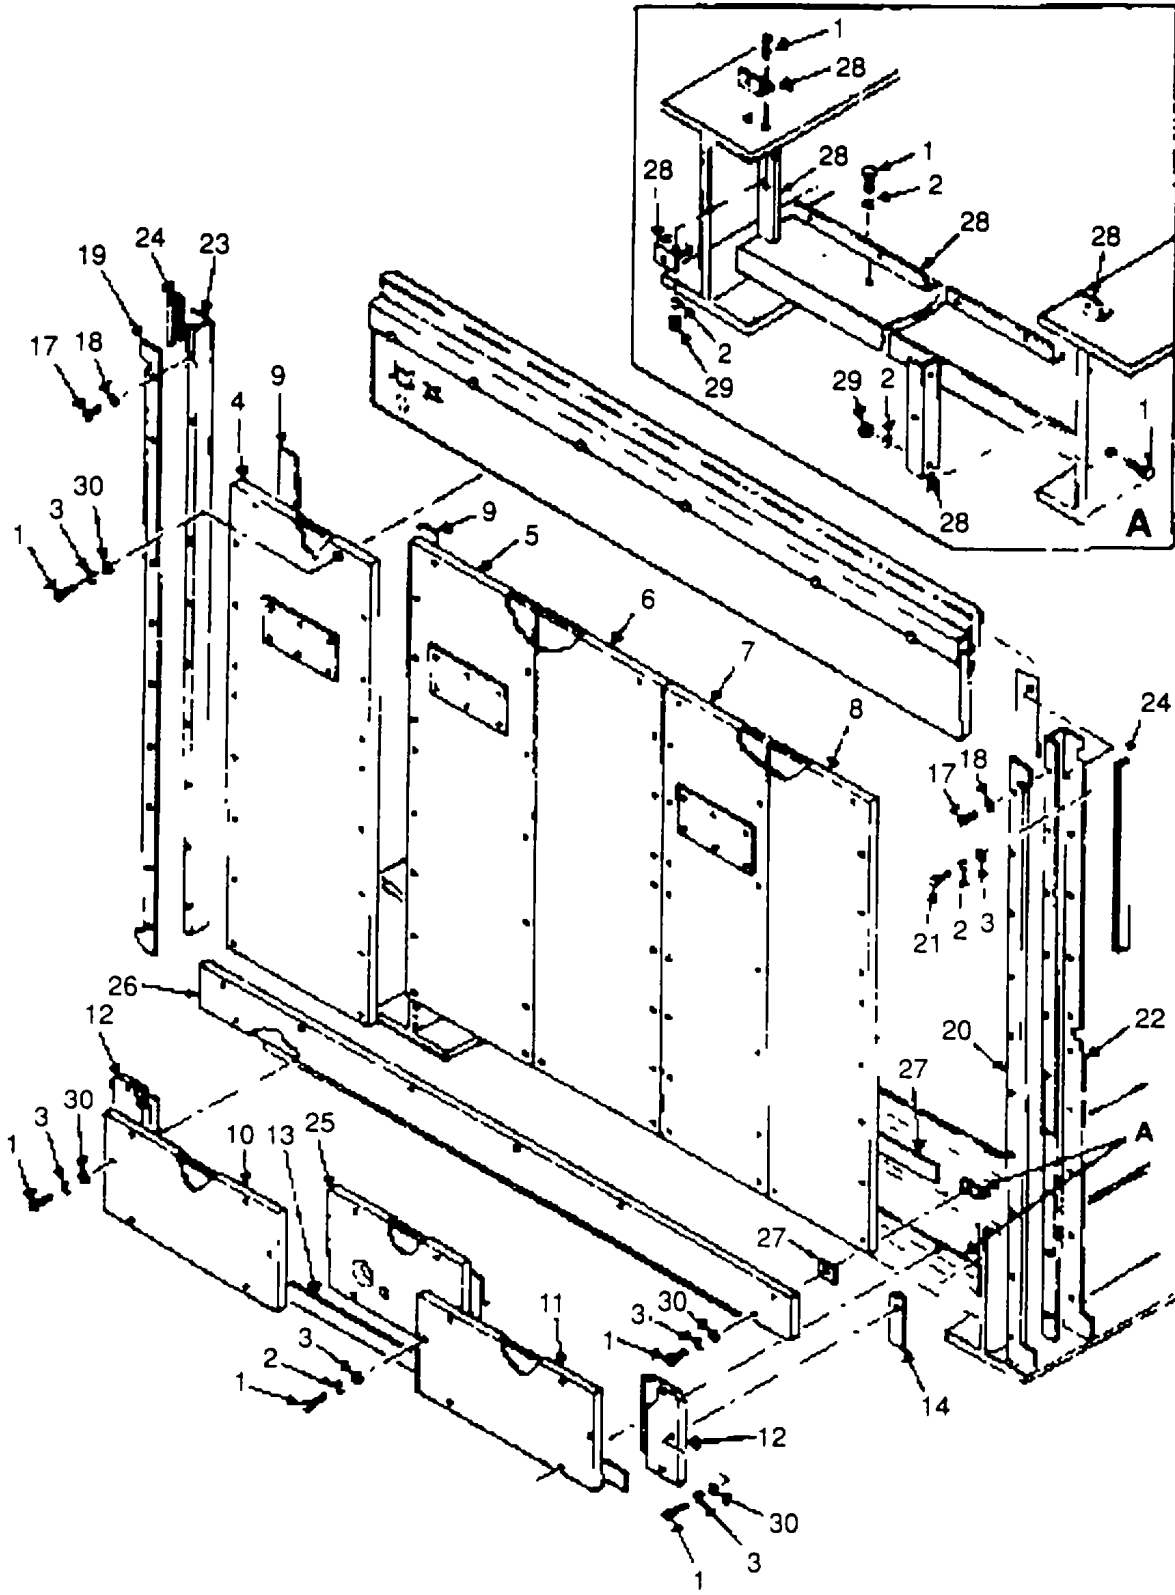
Switchgear Access Panel (Sheet 1 of 2)
